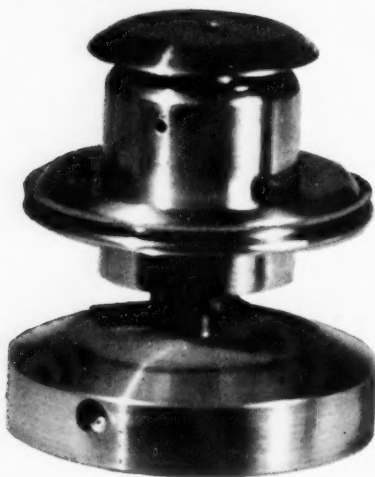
The "Malkin" patent vacuum chuck for use on the cup turning machine
